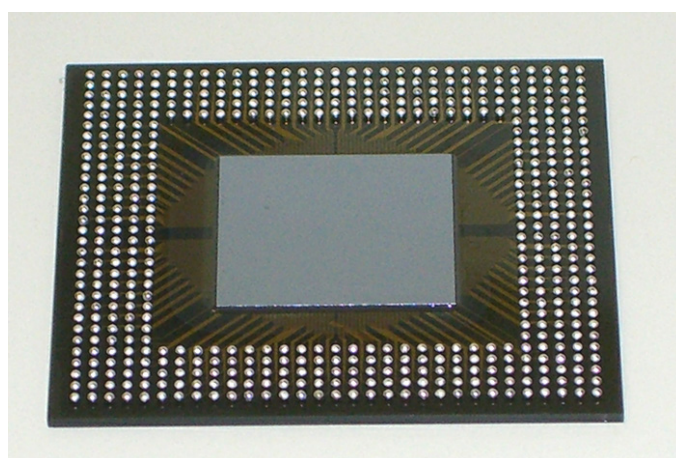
External view of SMAFTI Package. Center consists of I/F-TEG chip. Memory-TEG chips are molded in package.
